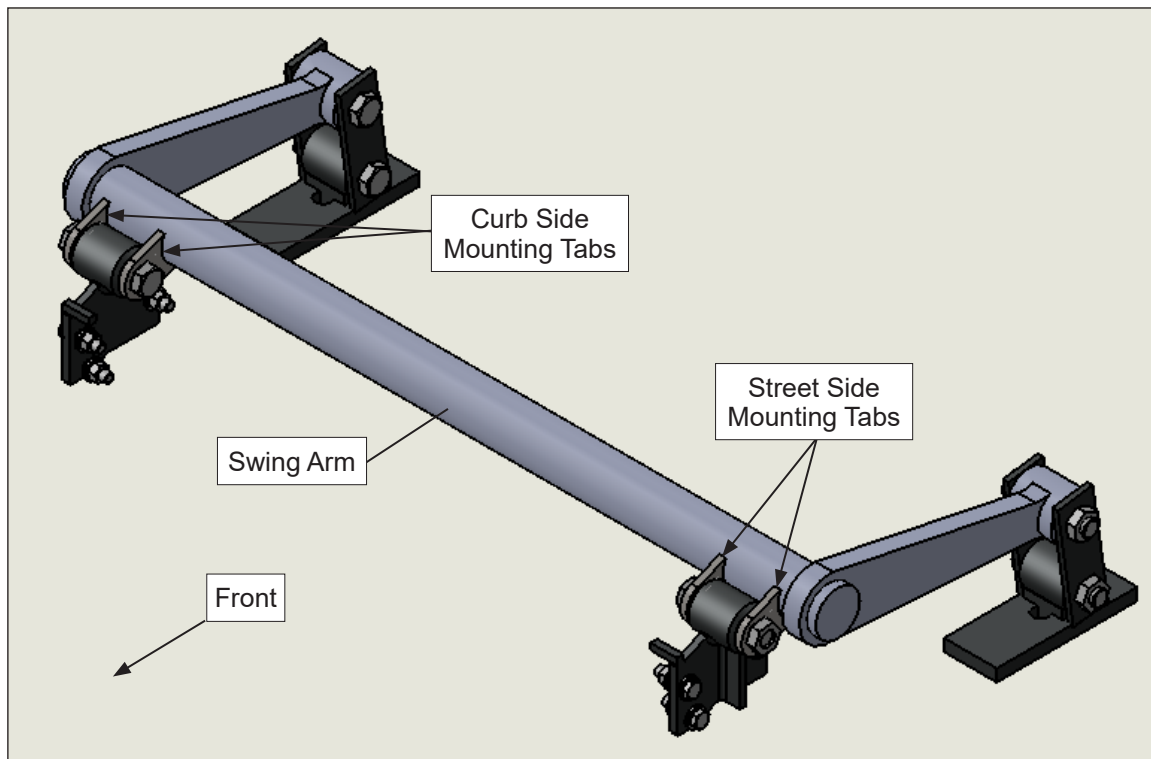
Torsion Bar Mounting Tabs to Inspect
